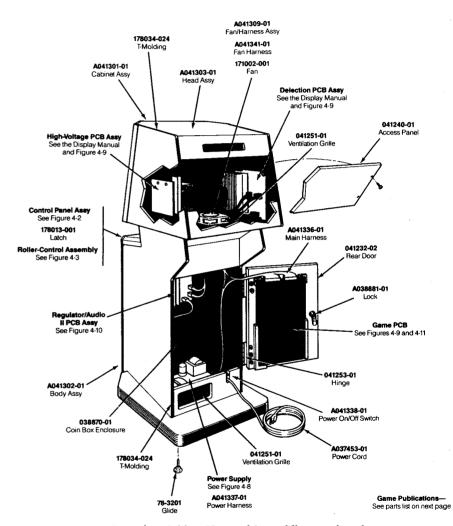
Cabinet-Mounted Assemblies, continued A041300-01 A
